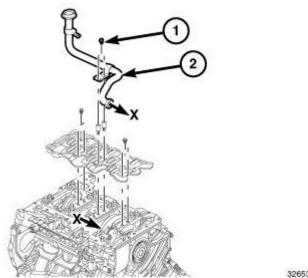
Oil Pump Pickup Tube & O-Ring Courtesy of CHRYSLER GROUP, LLC
